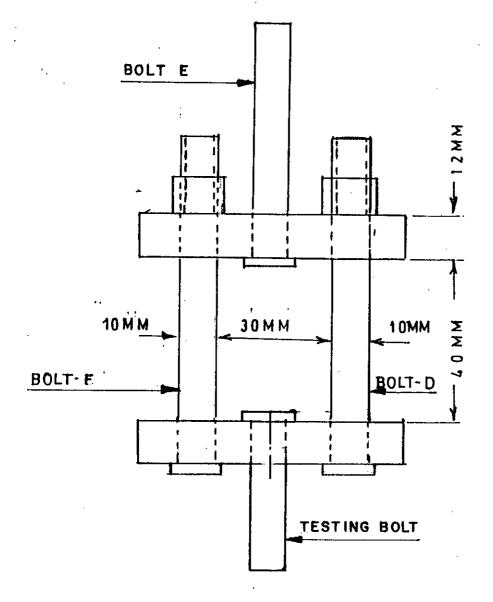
The special attachment used for uni-axial tension test of the virgin bolt.
